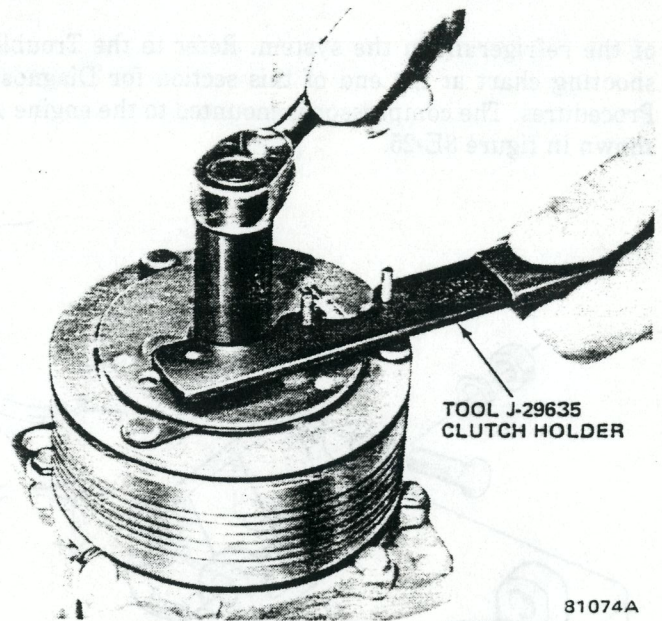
E-26 Removing Front Clutch Plate Hex Nut
